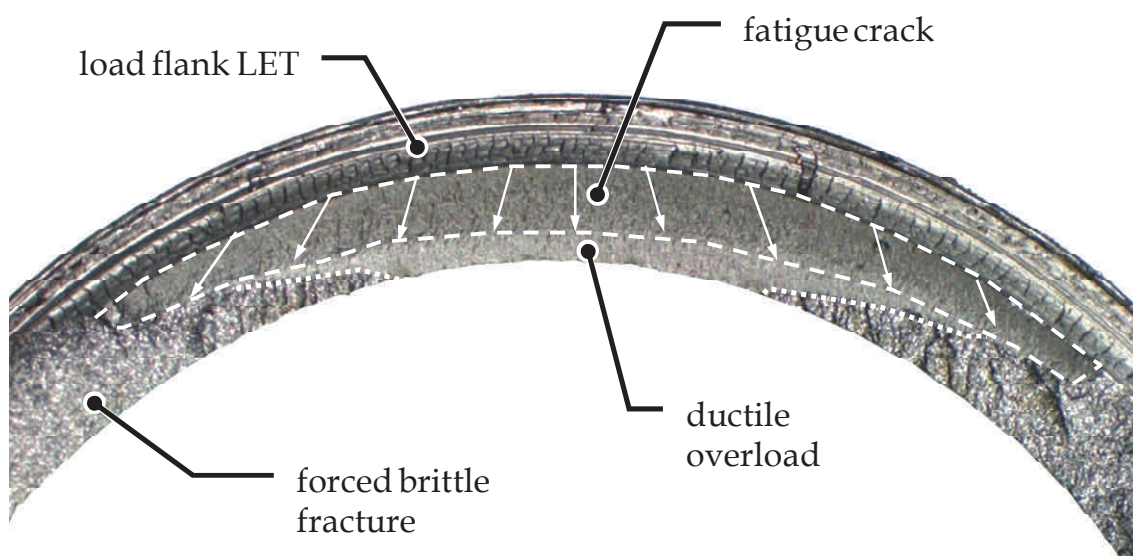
Fracture surface of a fatigue crack in a standard 1" API Line Pipe specimen.
